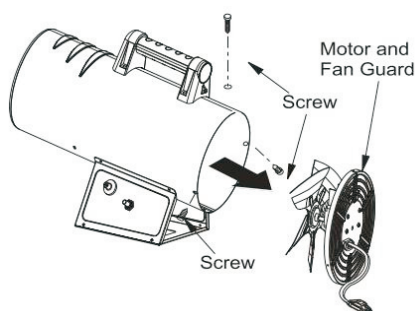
Removing Motor and Fan Guard from Heater (Heater may vary from illustration)
